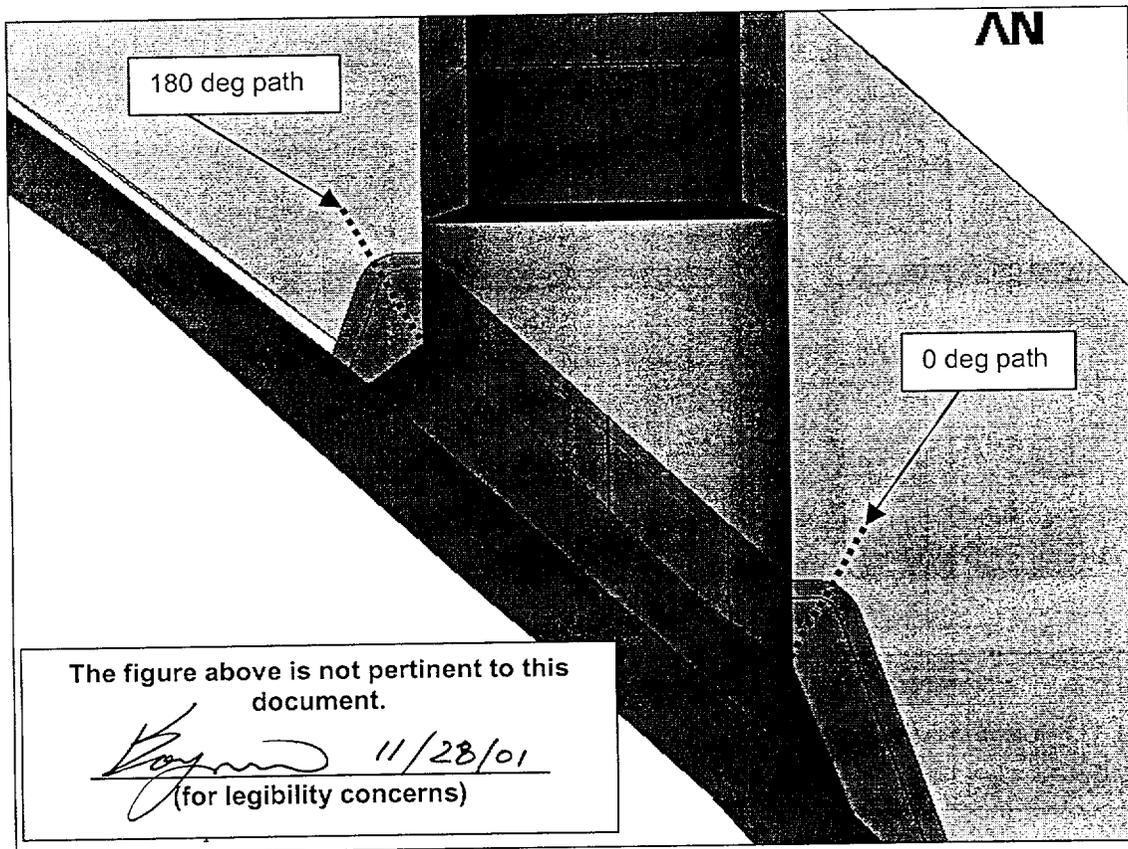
Close-up of Paths Through Original Welds/Head
